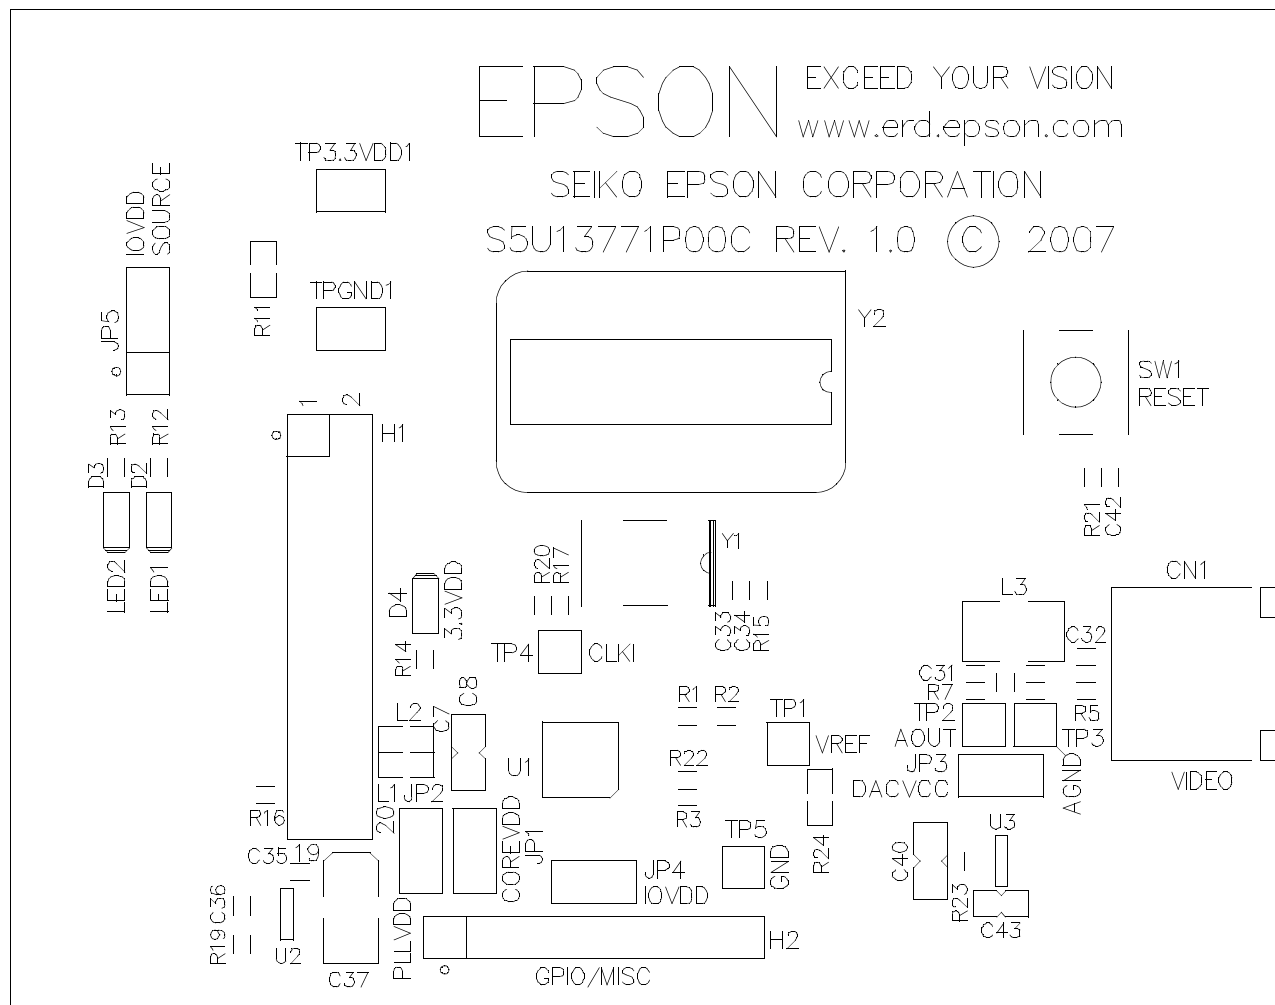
S5U13771P00C100 Board Layout - Top View
